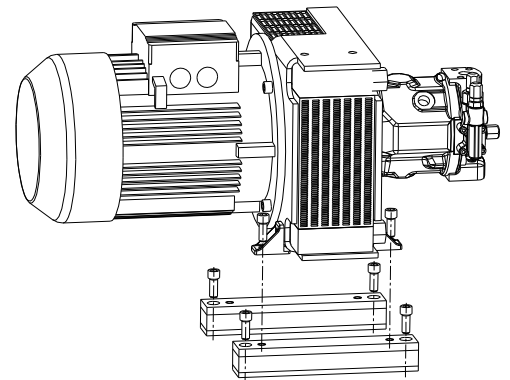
Assembly of damping rods DSK with PIK oil cooler
